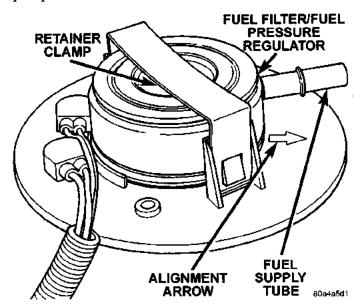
Fuel Filter/Fuel Pressure Regulator
